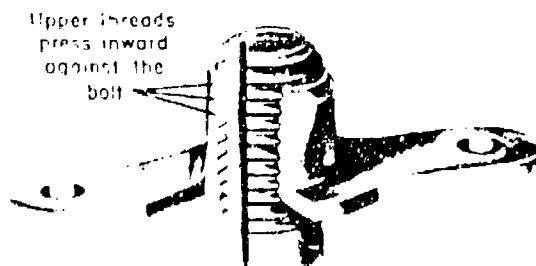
Self-locking nut with thread slightly deformed inwardly to grip screw thread tightly. (Courtesy of Elastic Stop Nut Corp.)
